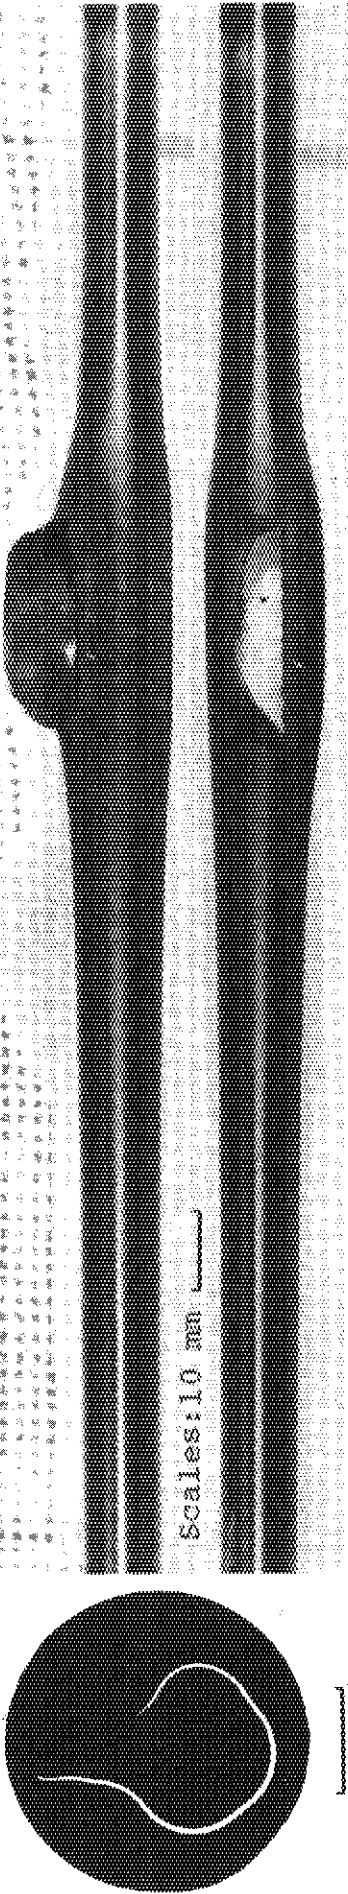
Specimen cladding of Case B-4 (Fig.17). Seen from two directions (Right); cross section at rupture site (Left). Tested in eight external heater pipes.
